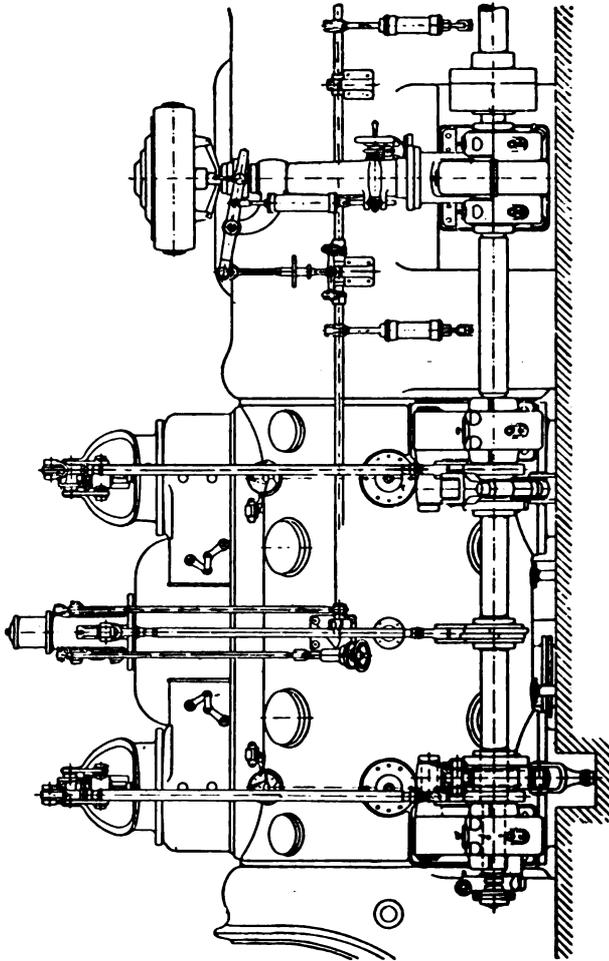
Governing Mechanism, Otto-Deutz double-acting Engines.
